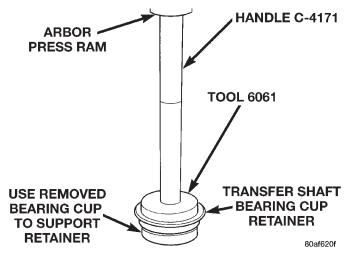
Install Transfer Shaft Bearing Cup Into Retainer
